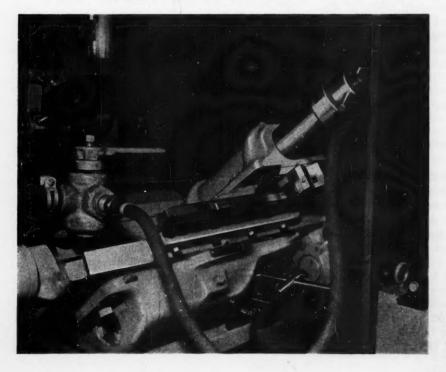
Cam and follower on a centeriess grinding machine which accurately control motions of diamend used for dressing the two formed wheels.
